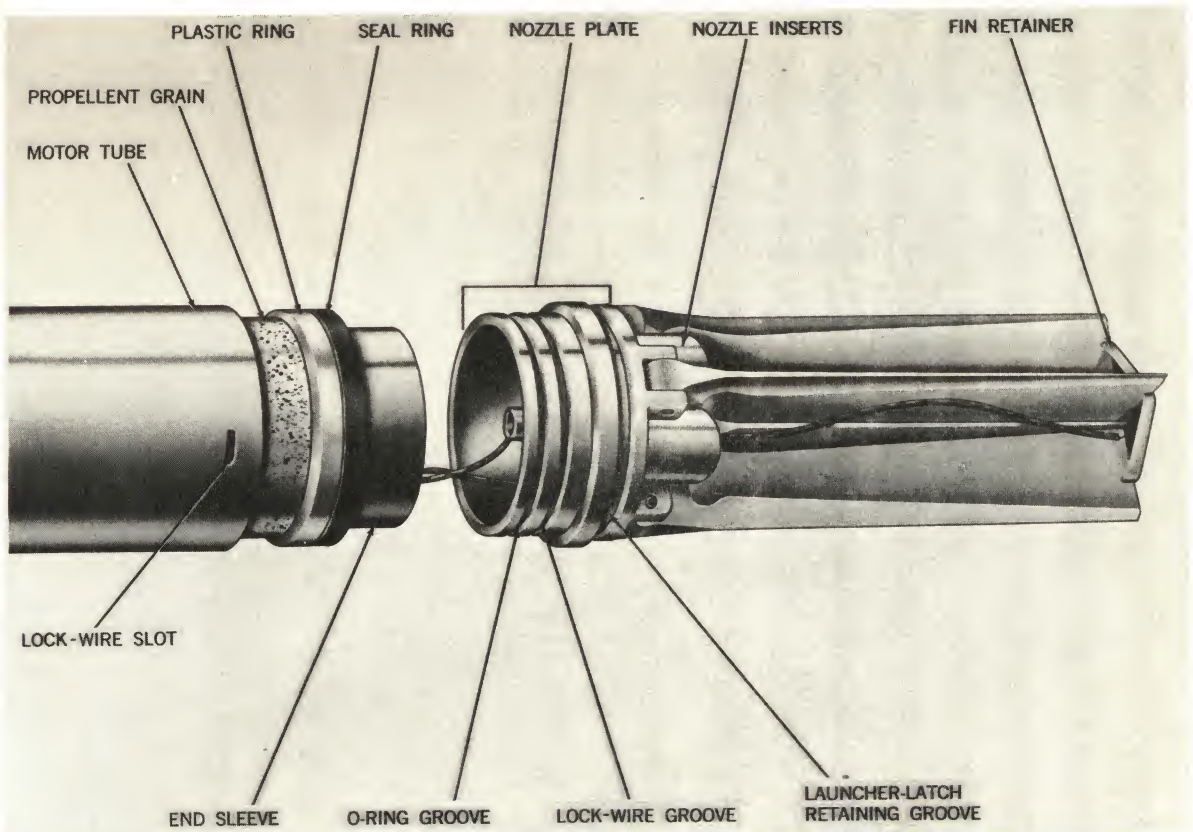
Nozzle-Fin Assembly and After End of 2.75-Inch FFAR Motor, with Propellant Grain Partially out of Motor Tube.
